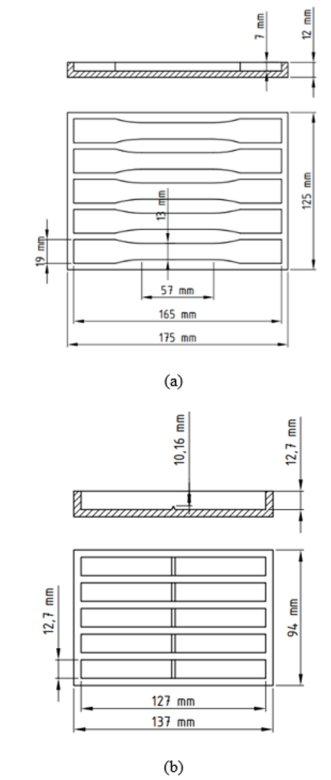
Shape and size of specimen mould. (a) Tensile test specimen, (b) Impact test specimen.
